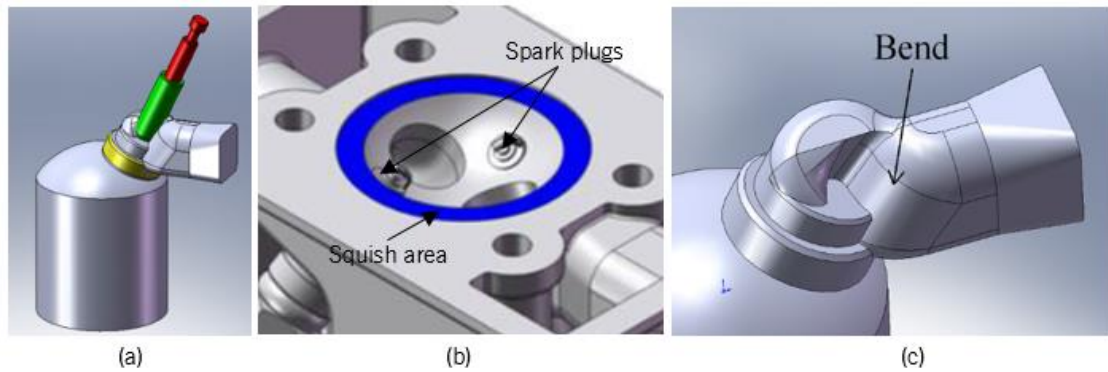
(a) Intake channel assembly; (b) UMotor combustion chamber showing the squish area and two spark plugs; (c) Working of the helical port.
